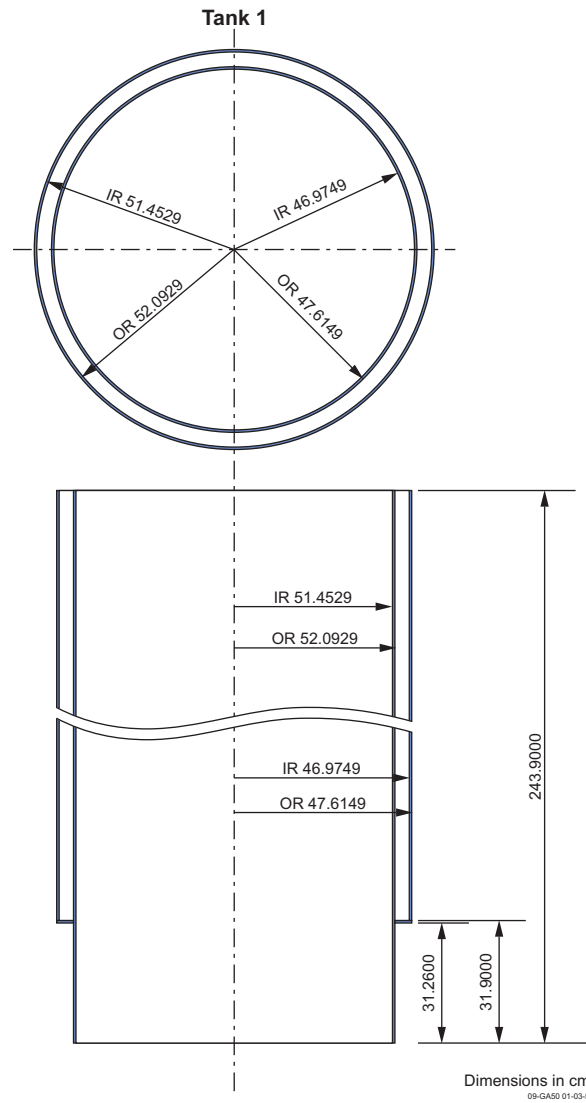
Tank 1 Dimensions Simple Model, Bottom 31.26 cm is the Extended Skirt.
